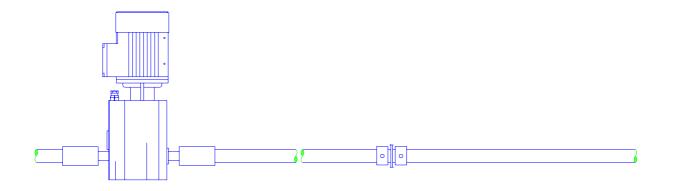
Adjusting rings with bearing for reduction of axial travelling.
